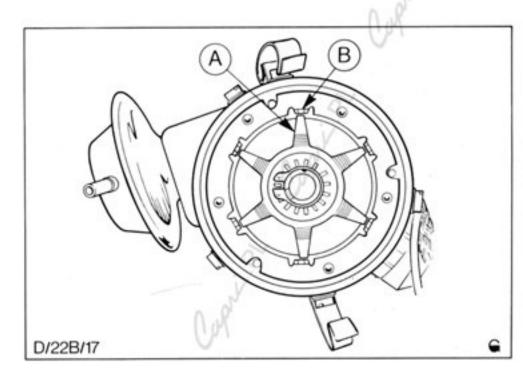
Distributor installed with trigger wheel and stator arms correctly lined up.
